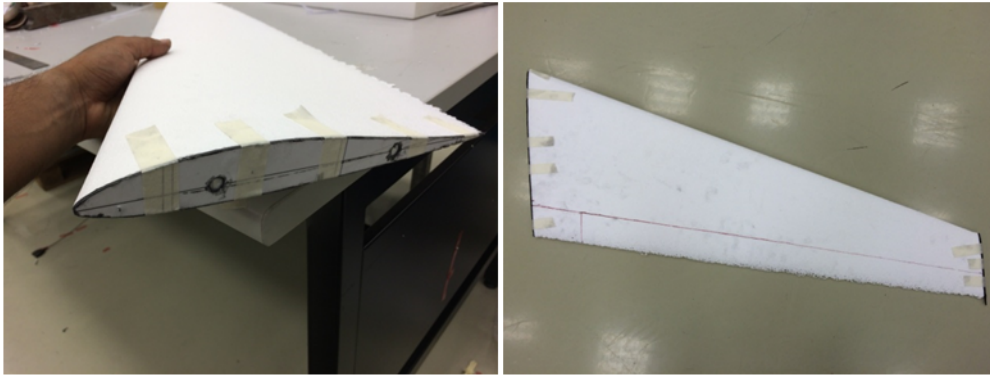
Gluing of the end ribs and drawing the control surface and rear spar location
